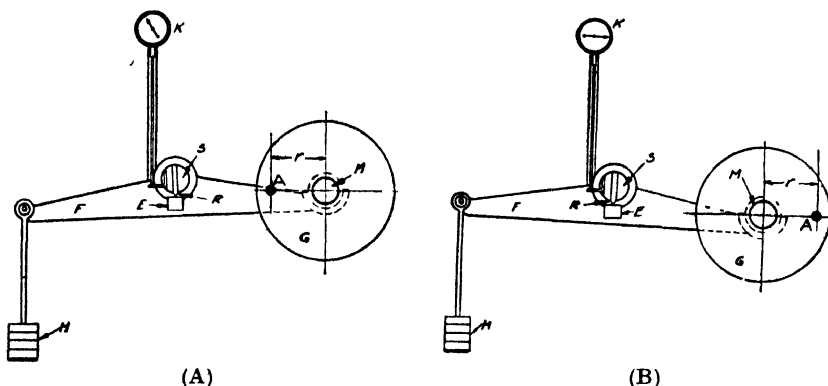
PRINCIPLE OF STATIC BALANCING MACHINE
